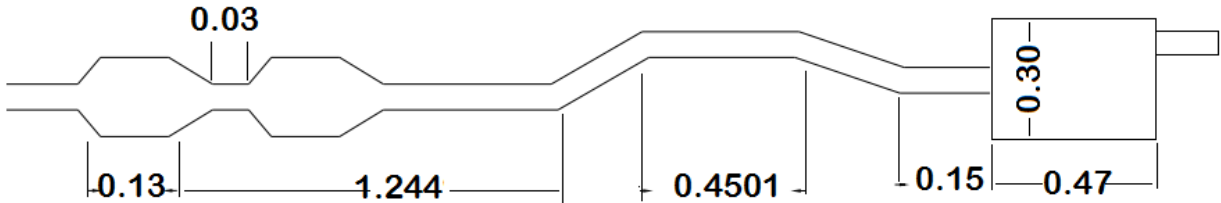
New Exhaust system dimensions(all dimensions in m)
